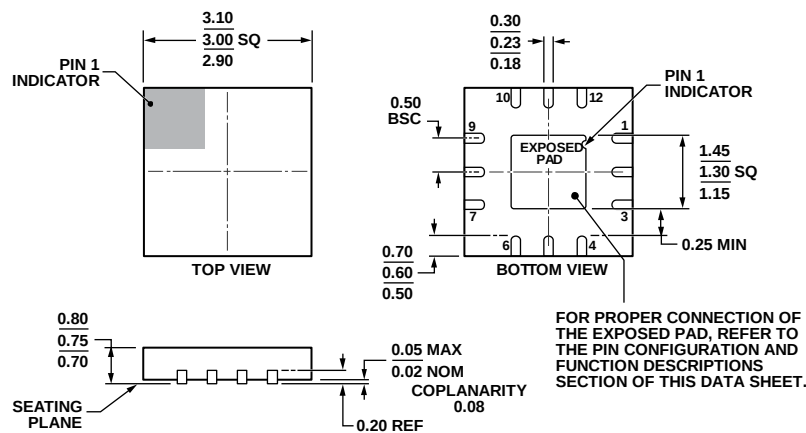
12-Lead Lead Frame Chip Scale Package [LFCSP]
